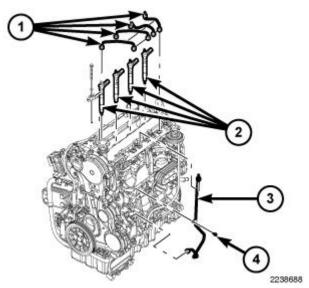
Vacuum Supply Tube Courtesy of CHRYSLER LLC
